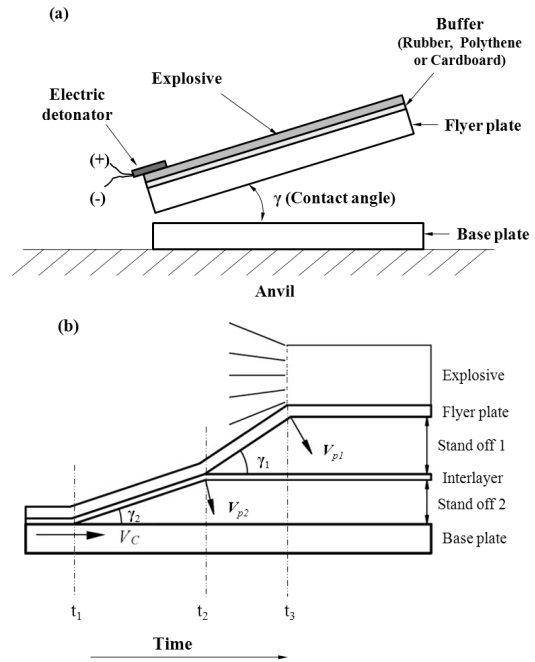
Schematic illustrations of (a) explosive welding device and (b) explosive welding mechanism
